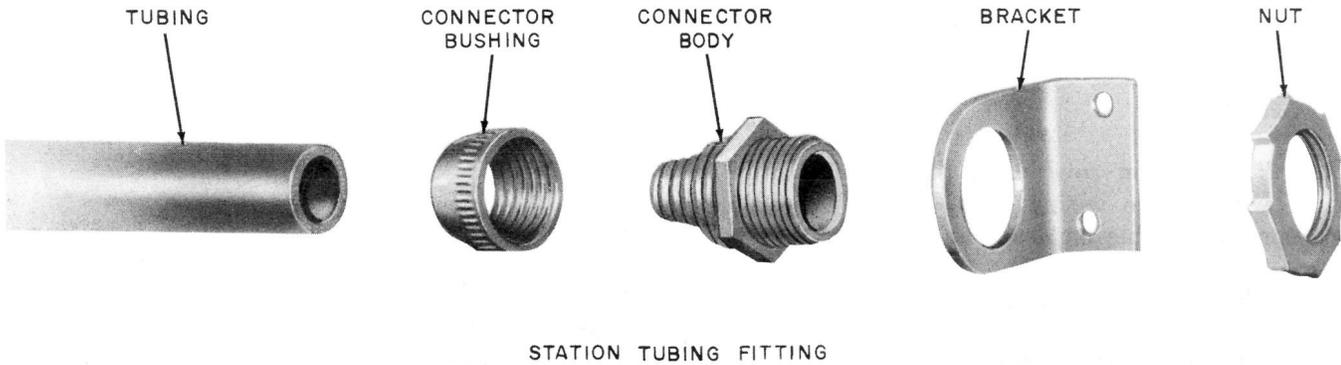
Assembly of Station Tubing and Fittings to Brackets
